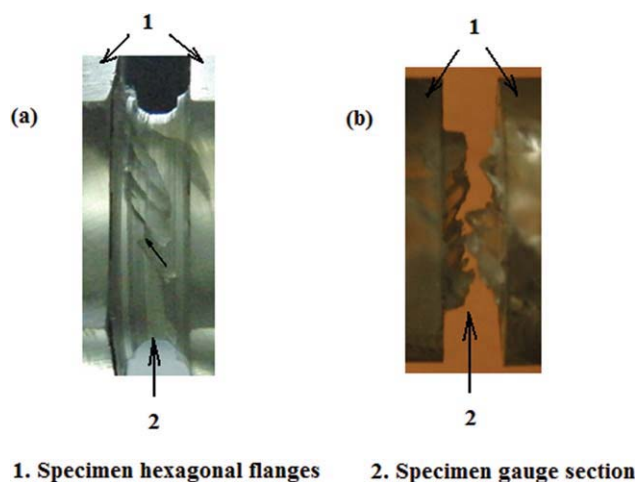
Photograph of failed specimens: (a) crack propagation along θ° to the axis of the specimen, (b) specimen broken into two pieces within the gauge length. [Color figure can be viewed in the online issue, which is available at wileyonlinelibrary.com.]
